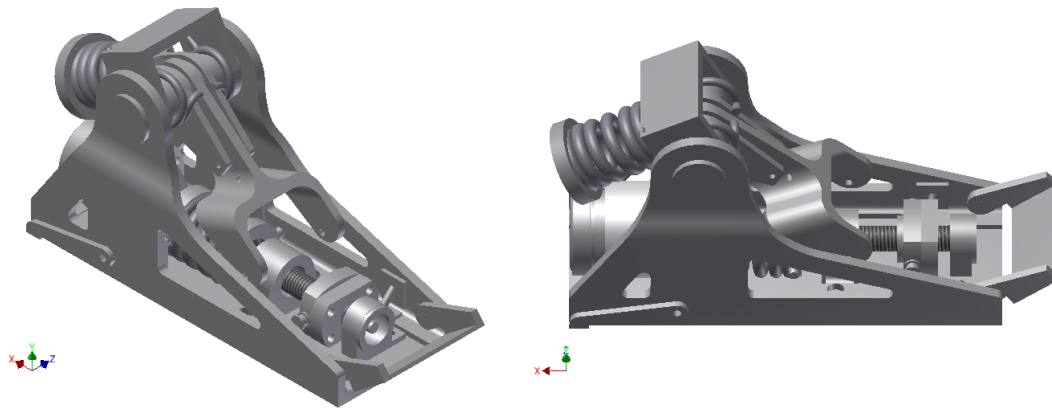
The prosthesis' arrangement at TO. The locking mechanism blocking the large lever arm is unlocked, the large lever arm rotated over an angle of about  $-20^\circ$ . The small lever arm rotated over an angle of  $30^\circ$  and the ball screw nut is at its ultimate position. The toe joint is lifted because only the toe of the prosthesis has ground contact. The small torsion spring that has to be used to return the toe joint to its original position is not drawn. A small recall spring attached to the large lever arm returns the arrangement to the initial position after this.
